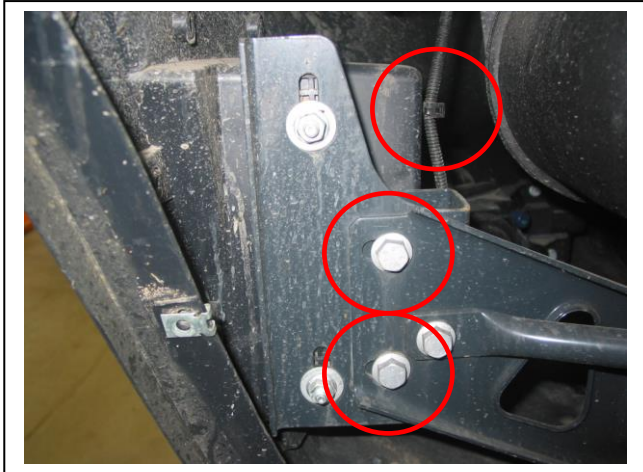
Two 16mm head bolts to remove and disconnect wiring harness from mount.
